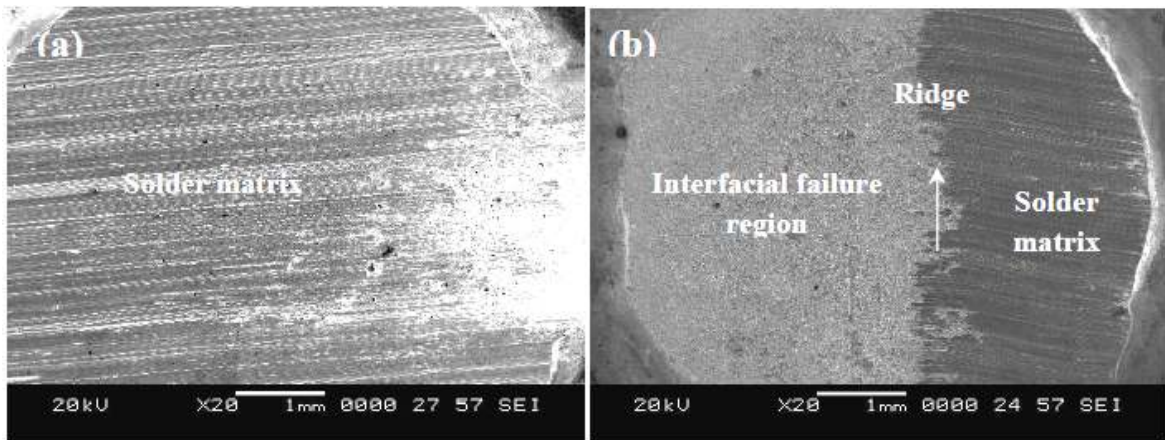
SEM micrographs of the fractured surfaces of (a) Sn-2.5Ag-0.5Cu (b) Sn-3Ag-0.5Cu solder alloys on Ag coated Cu substrate surfaces
